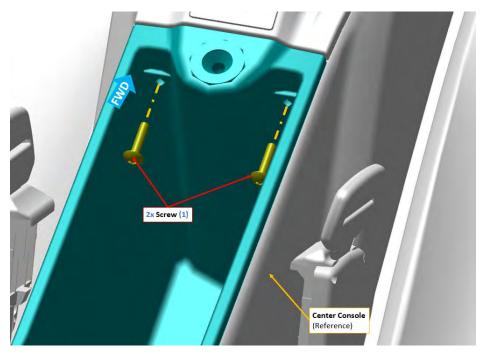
FWD EDGE BUCKET SCREWS
